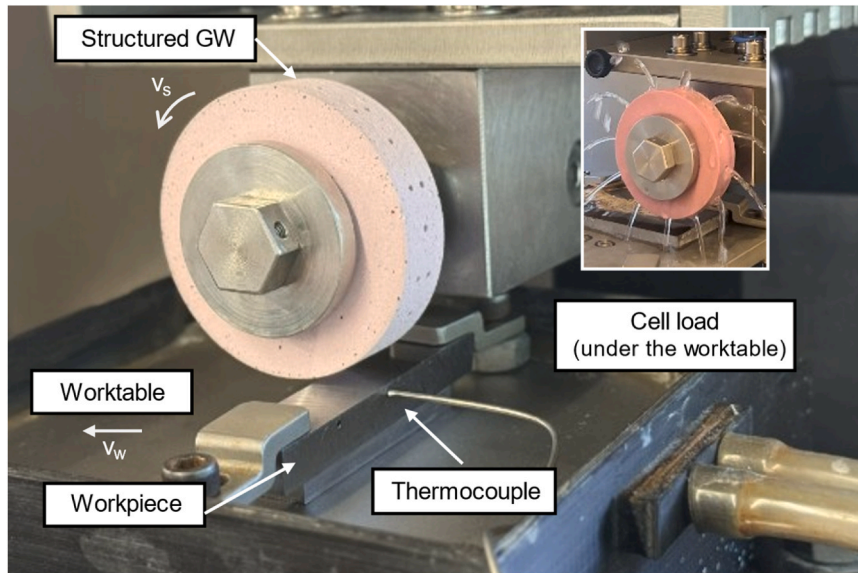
Experimental setup showing the structured grinding wheel, workpiece, feed and rotation directions, and sensor locations.
